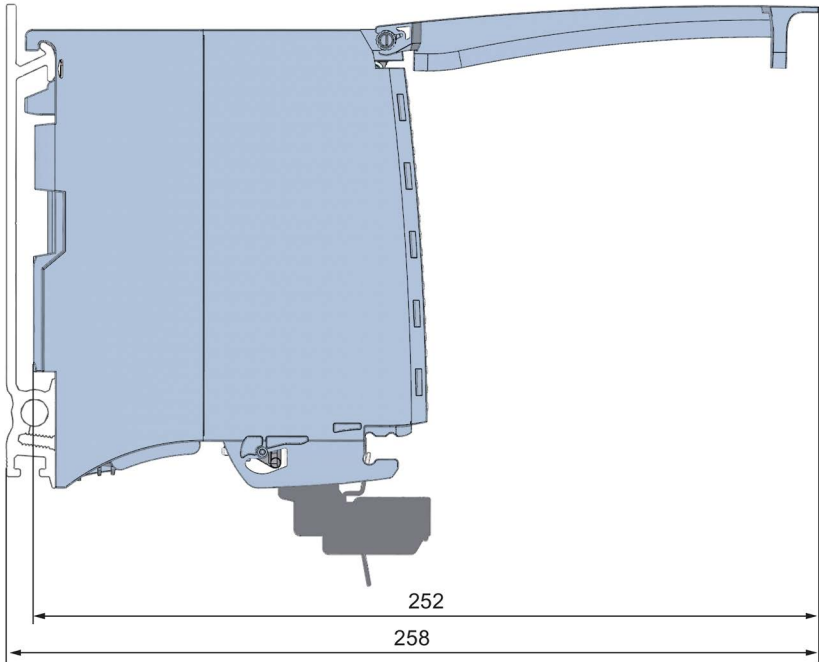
Dimensional drawing of the TM Timer DIDQ 16x24V module, side view with open front panel
